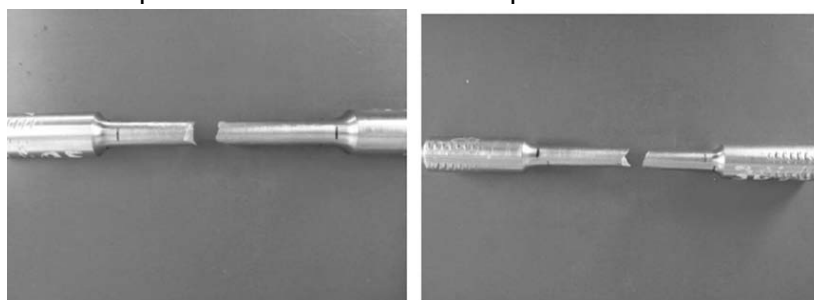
A way of taking and preparing a sample to stretch the weld metal. [26]SI. 9. Način uzimanja i pripreme uzorka za istezanje metala šava [26]
